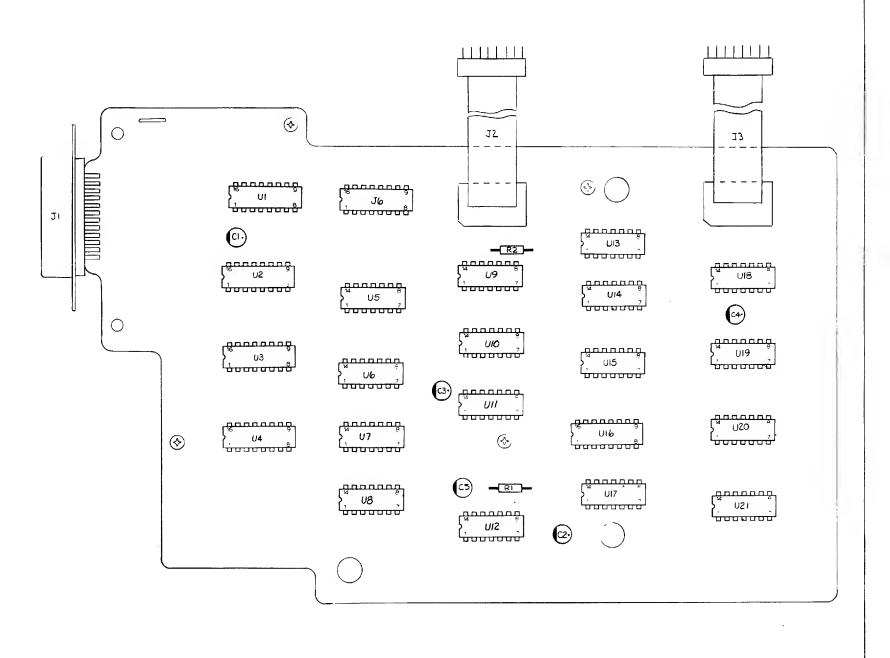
A16 IEEE-488 Bus Interface PCB Assembly, -15 Option
